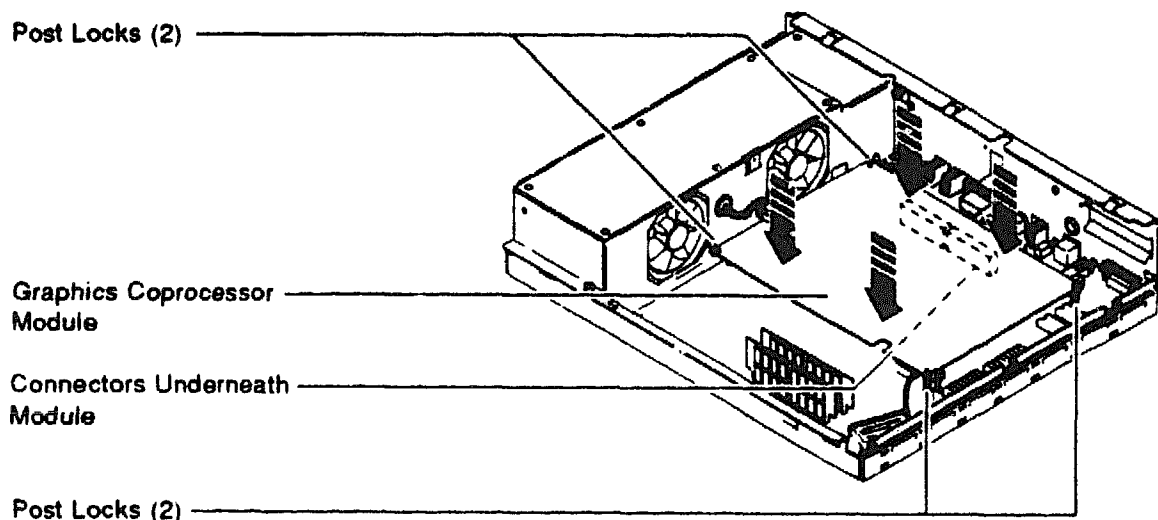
Mounting Post Locks on the Model 76 System Board
